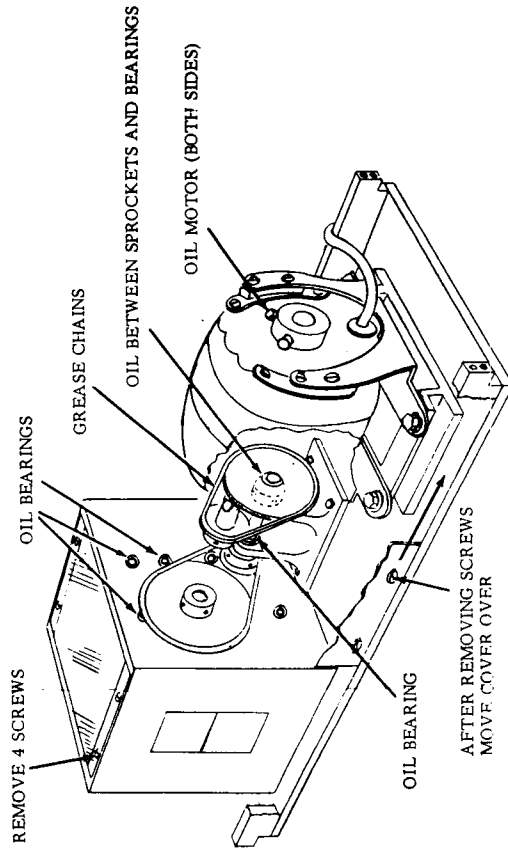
GEAR BOX AND MOTOR ASSEMBLY
